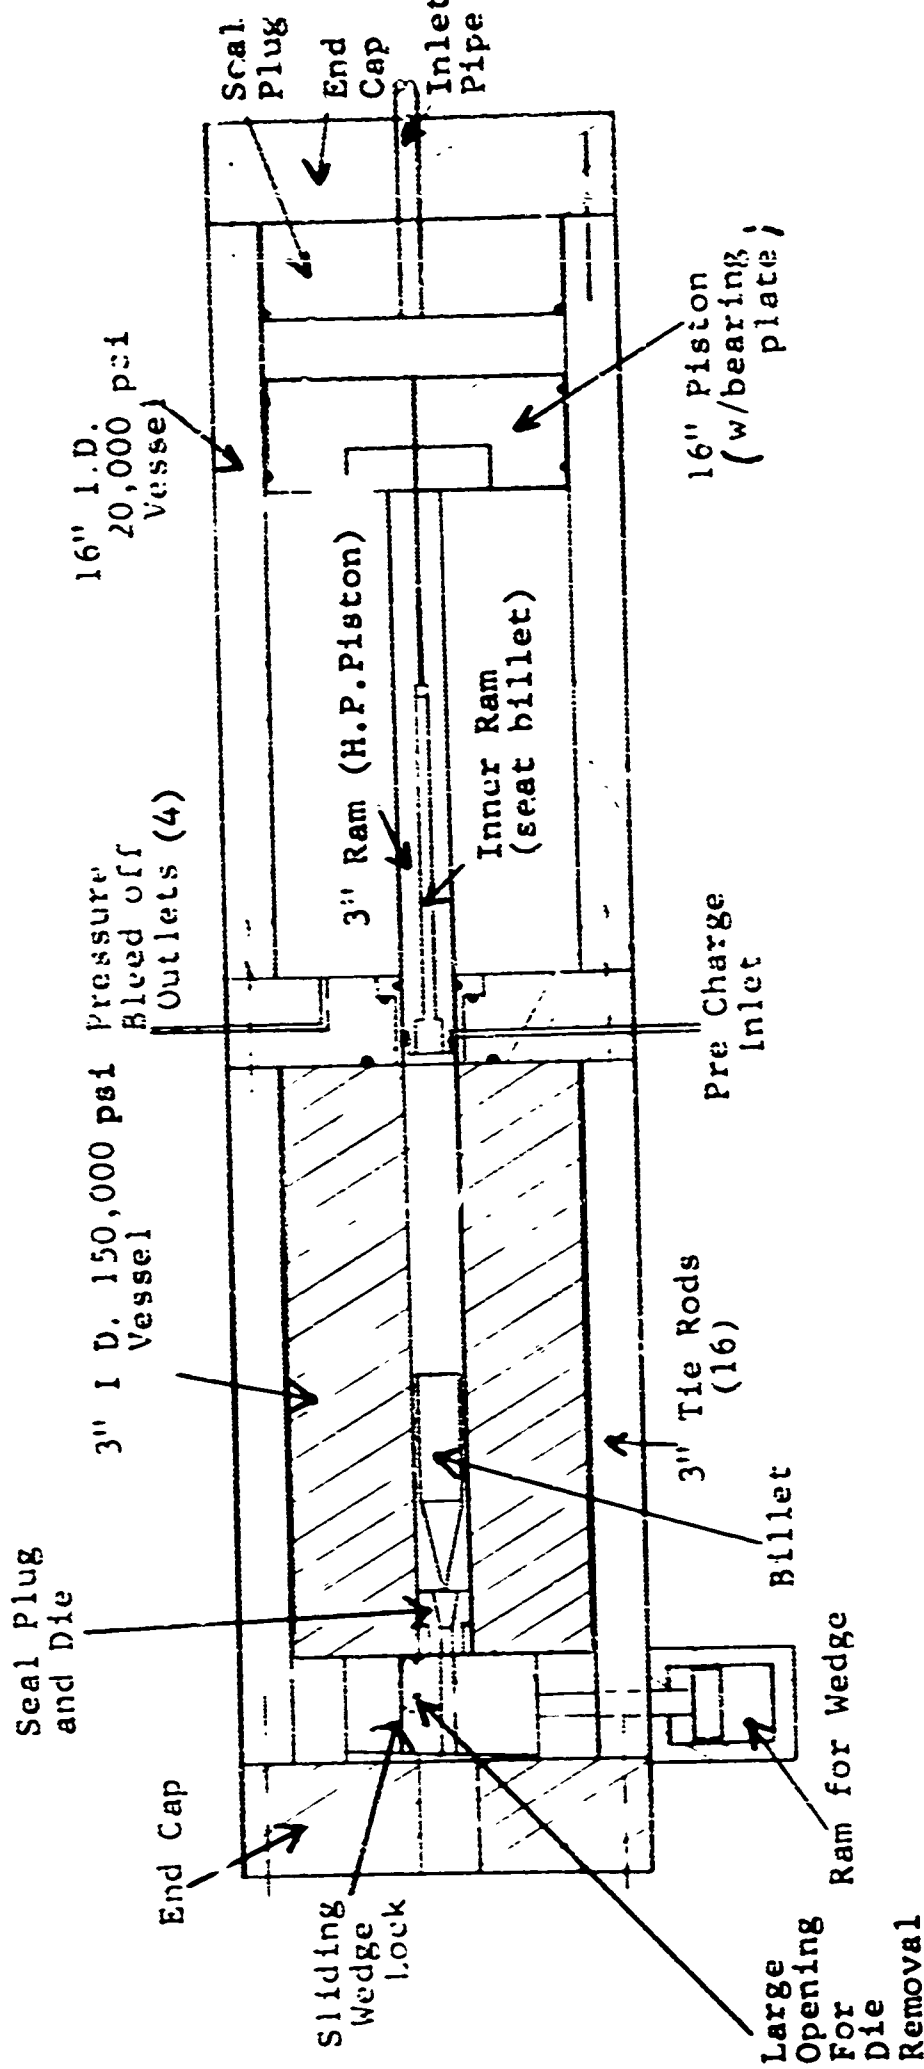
BASIC PNEUMATIC CUSHION EXTRUSION CHAMBER DETAIL
